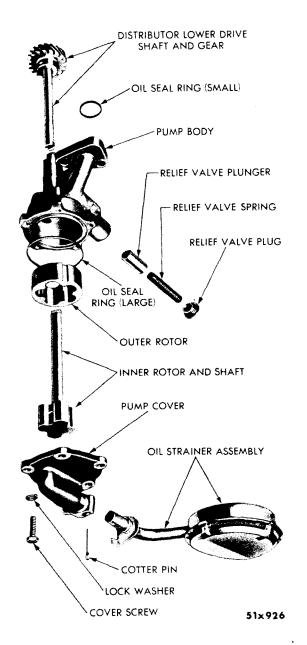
Oil Pump (Disassembled View) (Typical)
